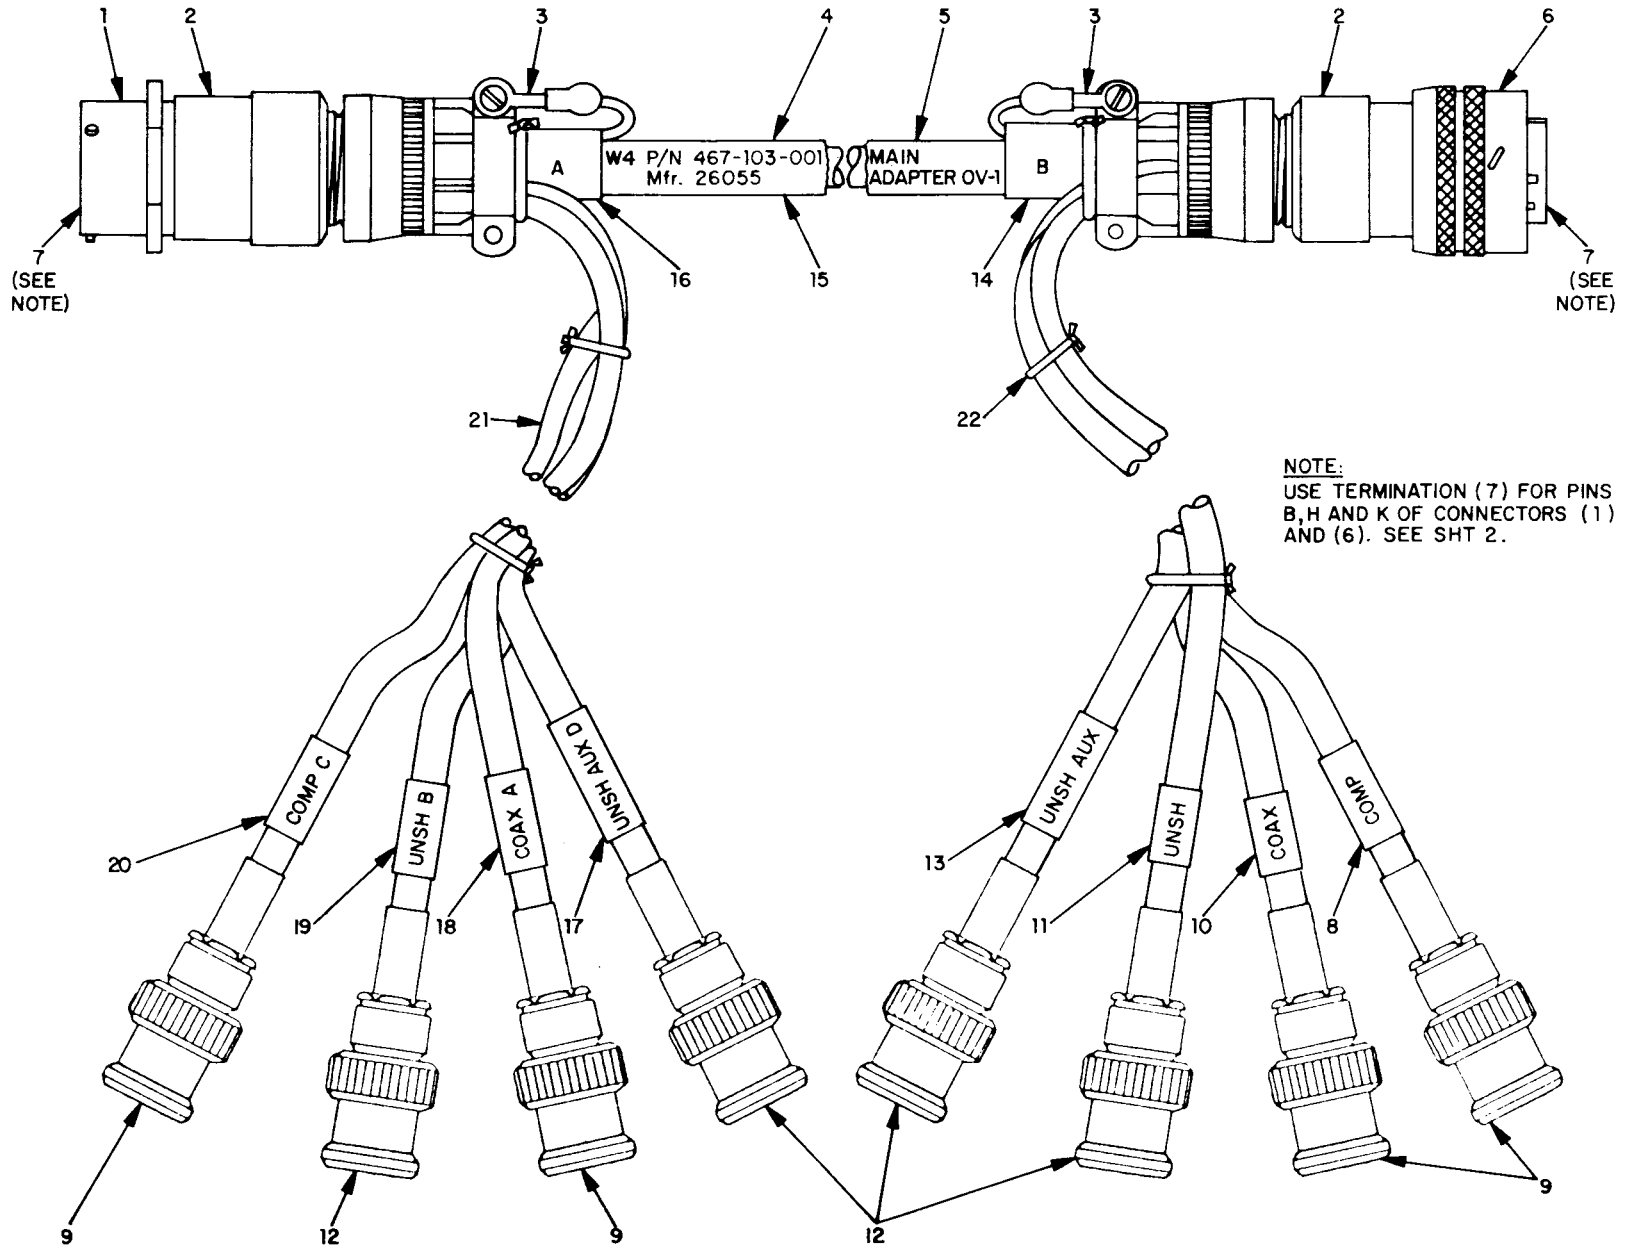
Main adapter cable assembly W4, part number 467-103-001 (sheet 1 of 2)
